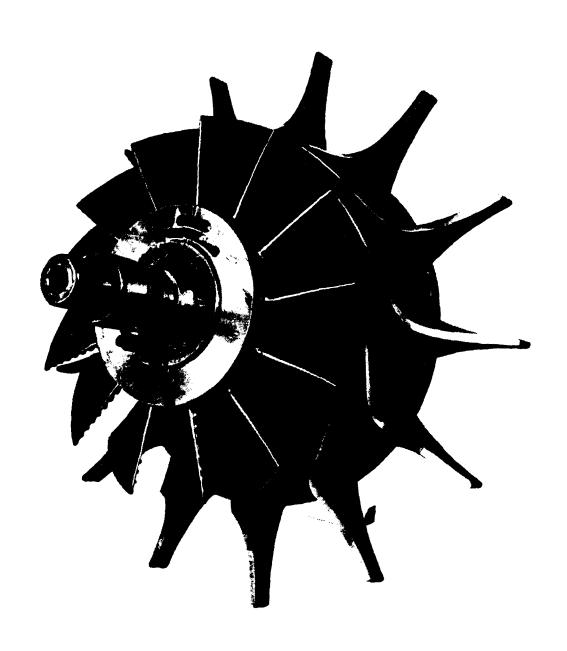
AIR-COOLED ROTOR, POST SPIN TEST
